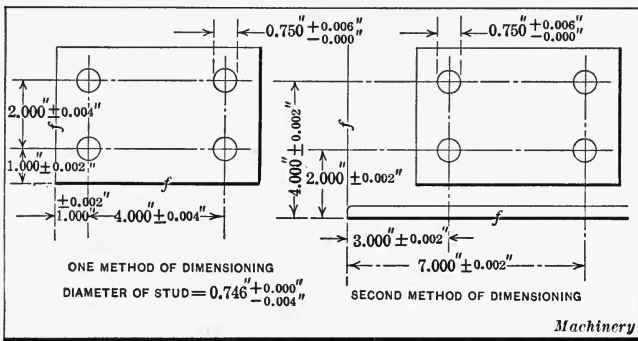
Two Methods of Dimensioning with Tolerance which maintain Identical Conditions
